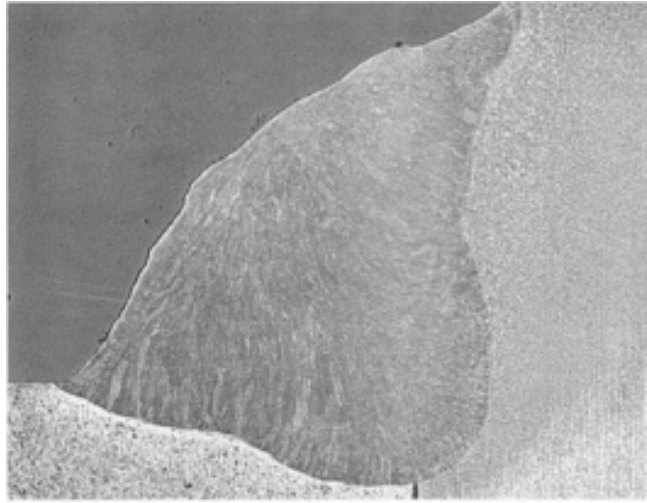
High-strength GMA weldment between an FN-0205 steering gear (6.9 g/cm^3) and a AISI 1035 steel shaft using an E70S-type filler wire
